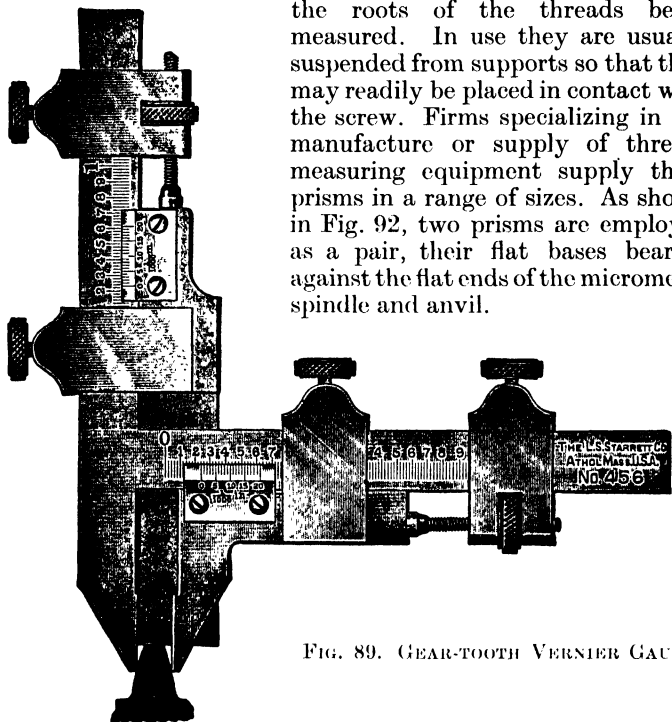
GEAR-TOOTH VERNIER GAUGE
